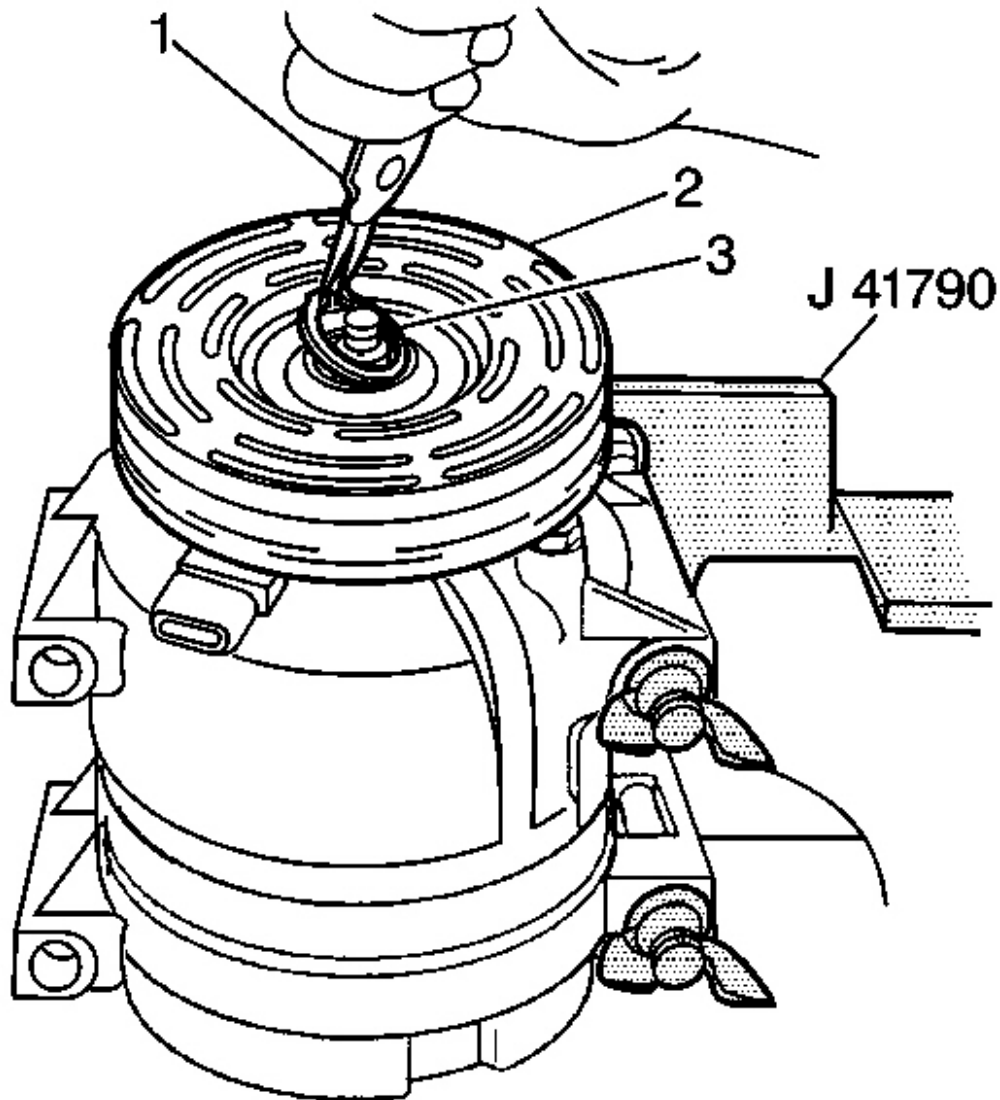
Clutch Rotor, Bearing & J 41790-A
